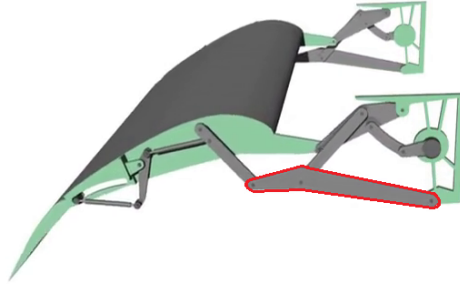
Illustration of a flap extension mechanism with component to be designed highlighted in red
